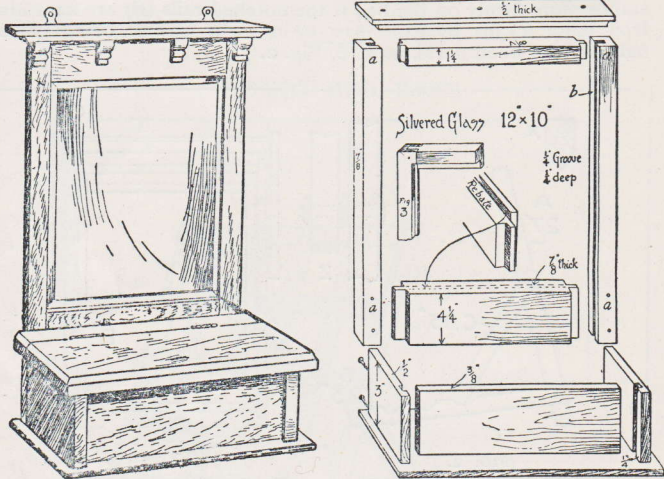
TOILET GLASS. FIGS. 2 and 3.—DETAILS OF CONSTRUCTION.
